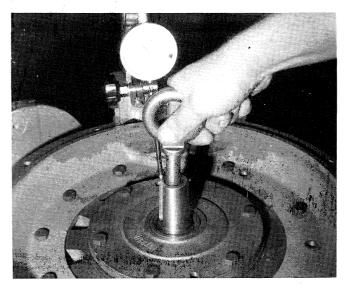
Applying pushing force while dial indicating end play of input shaft.
